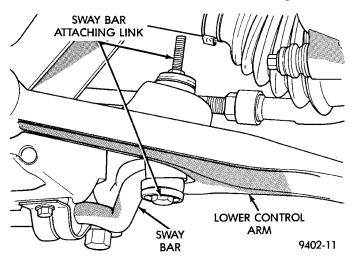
Stabilizer Bar Link To Lower Control Arm Attachment
